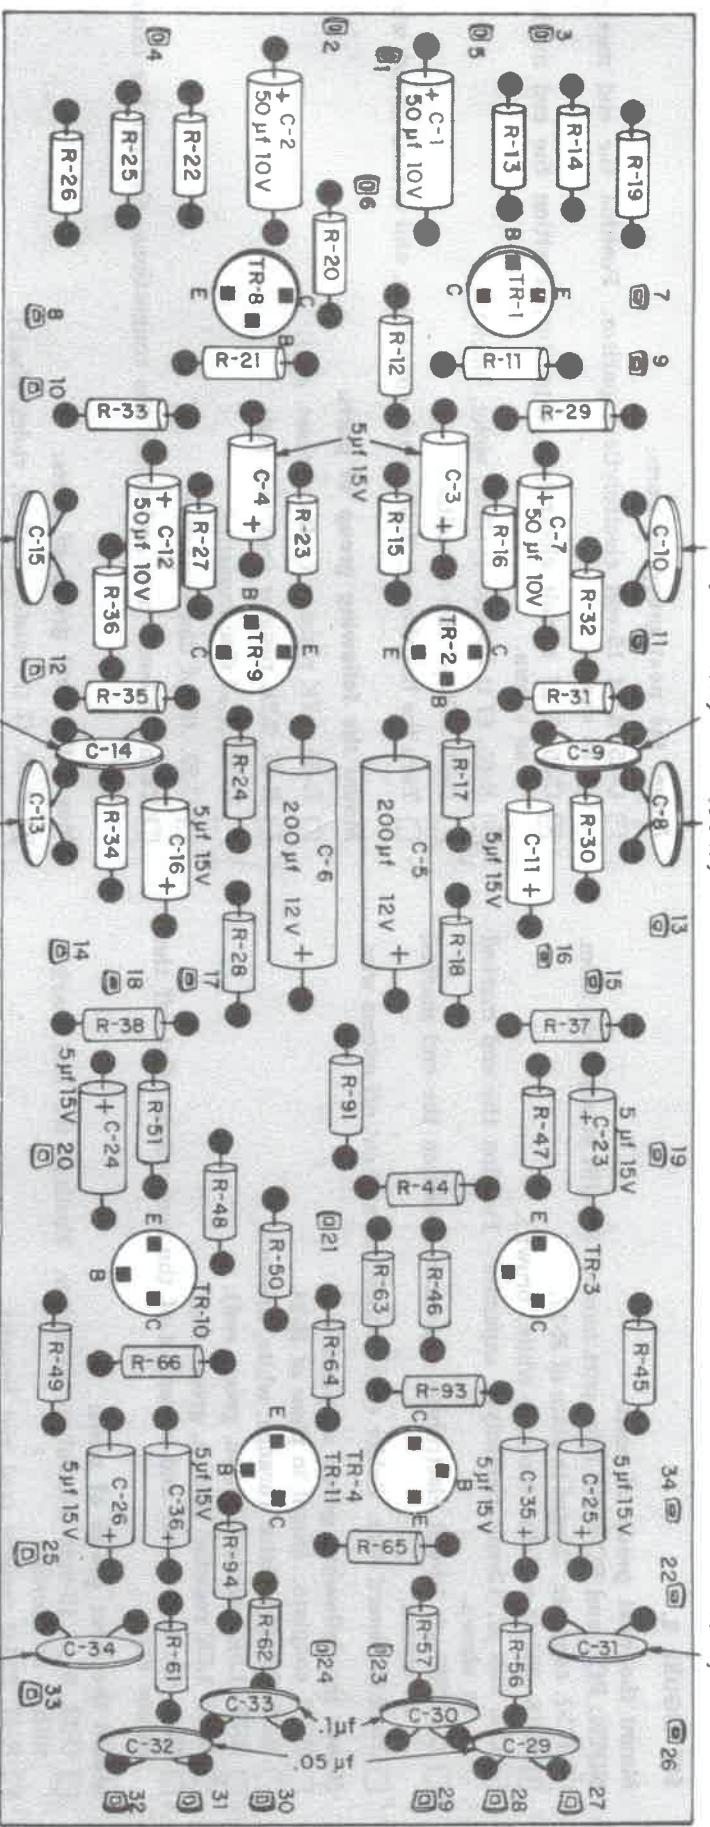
MOUNTING PARTS ON THE PRINTED CIRCUIT BOARD
